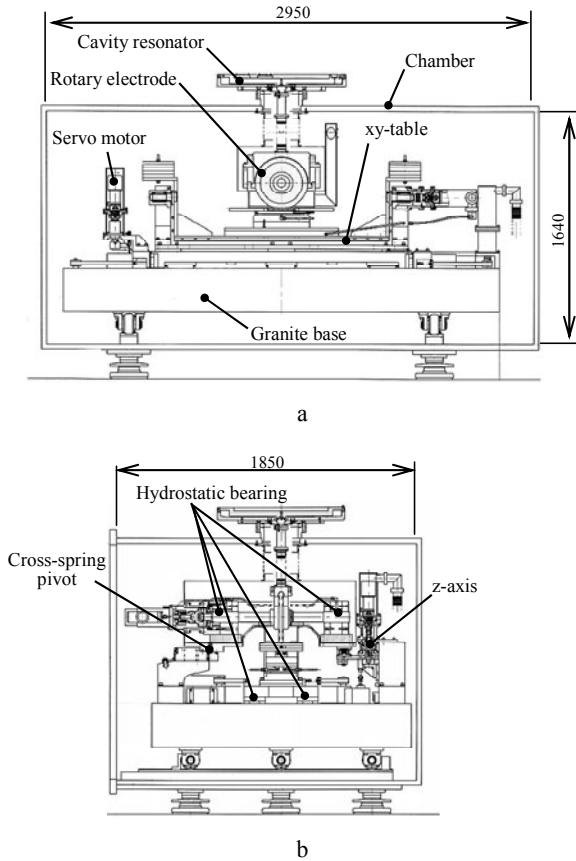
Schematic view of NC-PCVM machine; a. front view; b. side view
